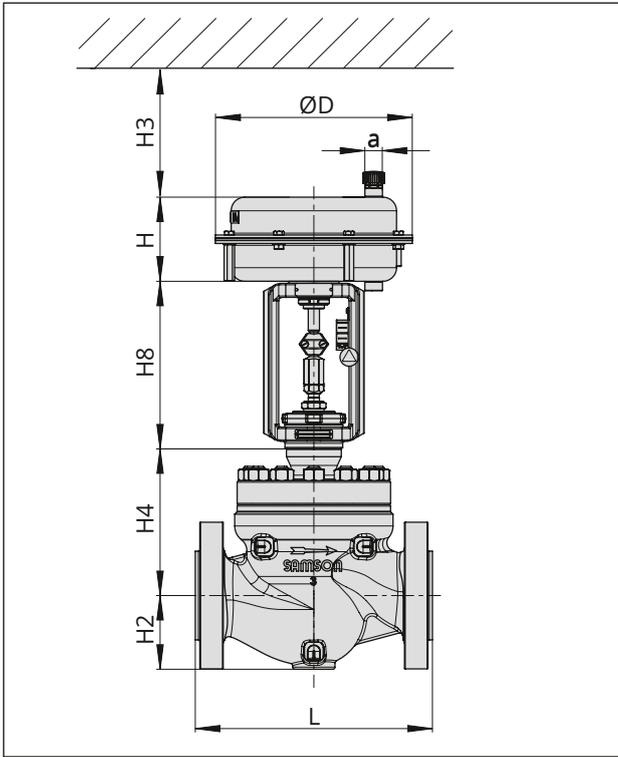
SMS MG-1 Control Valve: Type 251GR Valve with Type 3271 Pneumatic Actuator
